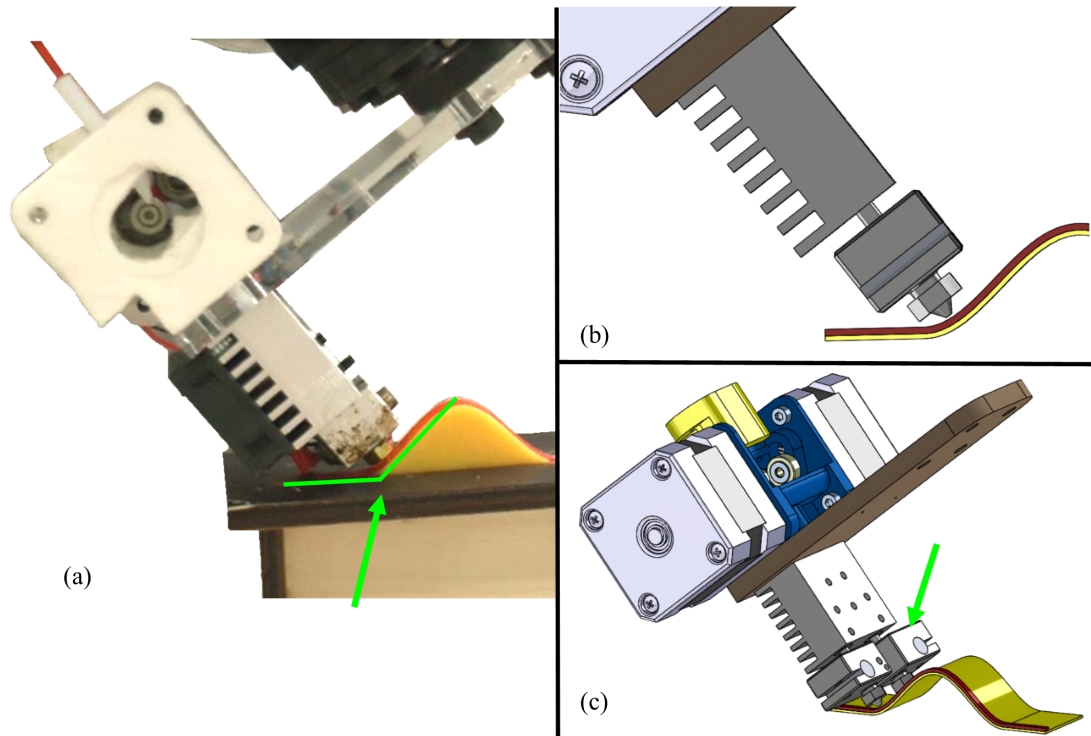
When printing nonplanar layers using the original extruder, only wide angled corners could be achieved without the heater block contacting the surfaces. (a) Minimum corner angle formed by the arch is marked in green. The heater wire is just touching the surface and the side of the nozzle and heater block would come into contact with the plastic if the angle was smaller. (b) Side view of the nozzle and arch so the tilt limits can be seen more clearly. The gradual change in angle allowed the arches to be printed successfully. (c) A Heater block is marked with the green arrow. It is wider than it is deep so the nozzle cannot be tilted the same amount in all directions. When two nozzles are being used on the extruder they also limit the directions in which the extruder can be tilted.
